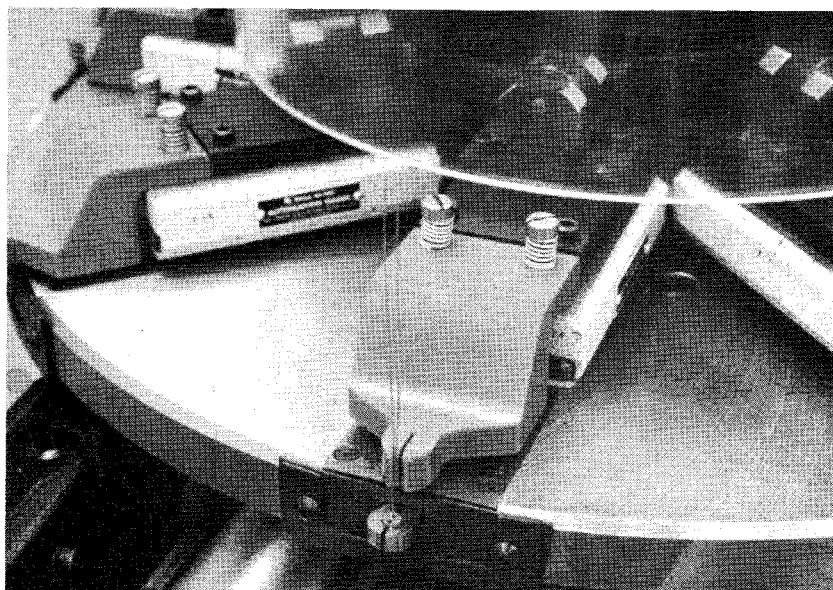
View of semiautomatic grinder showing nest device clamping DAP detonator head with wire inserts.
